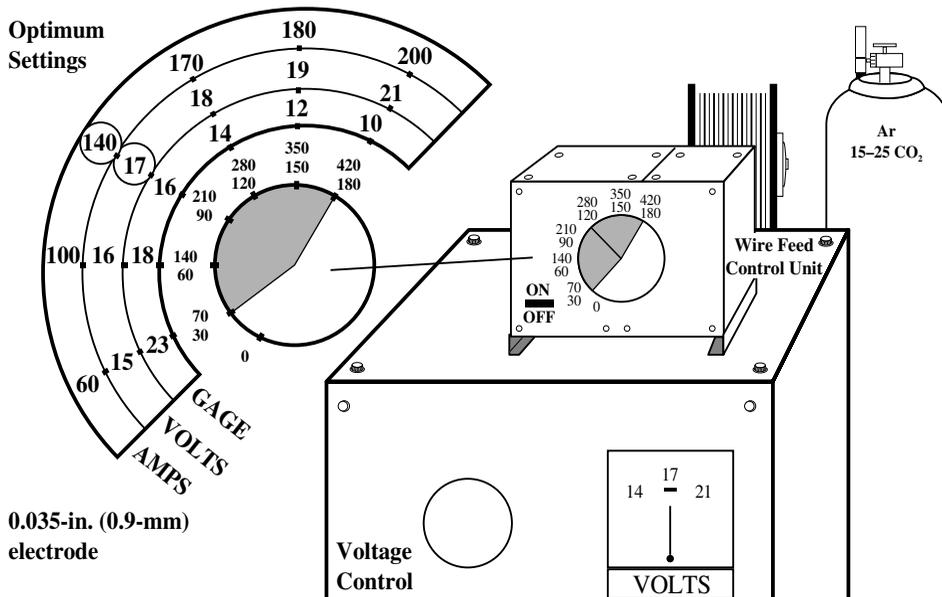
Wire Feed Settings for Short-Circuit Welding of Carbon, Low-Alloy, and Stainless Steel Sheet.
